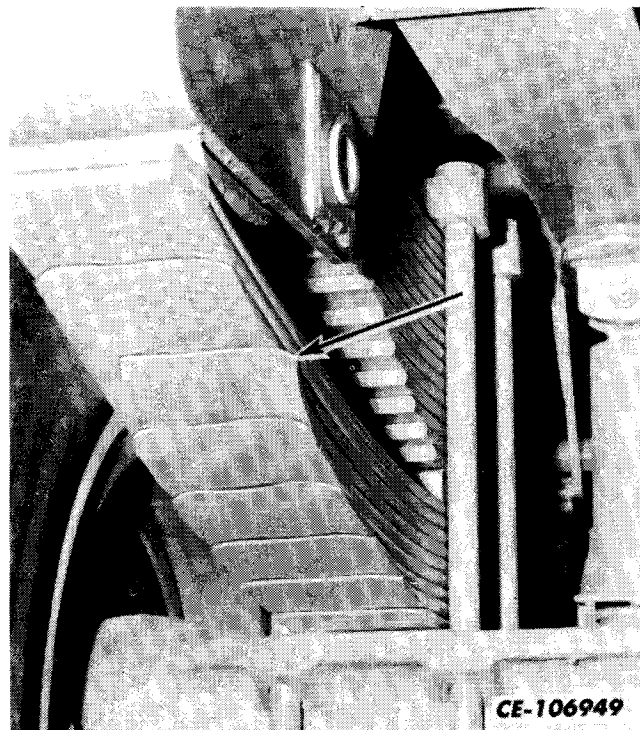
Spring Leaf Misalignment (Rear Spring Shown)
